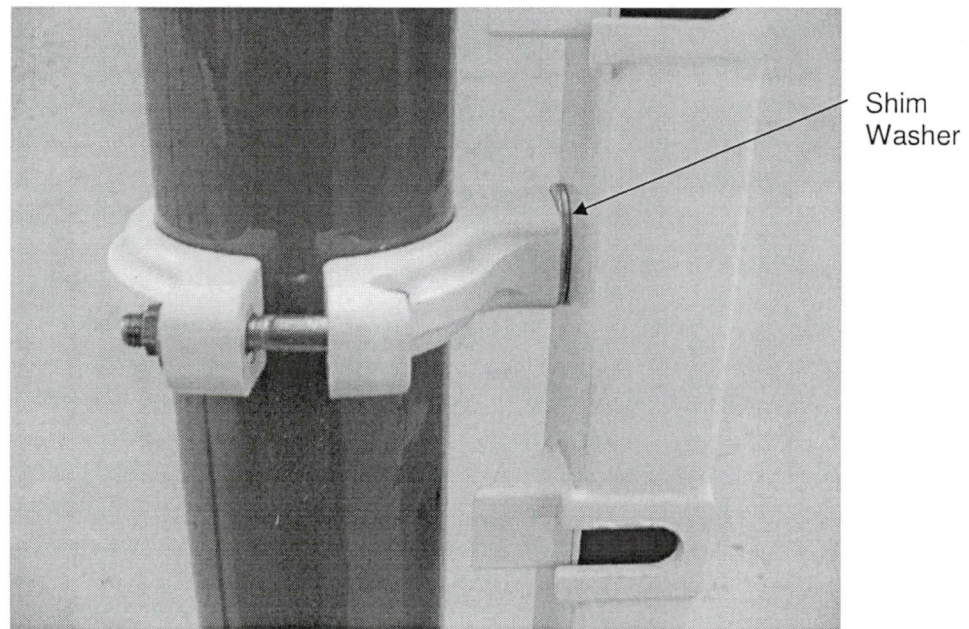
Beam Adjustment, Step 1 – Shim Rear Beam
